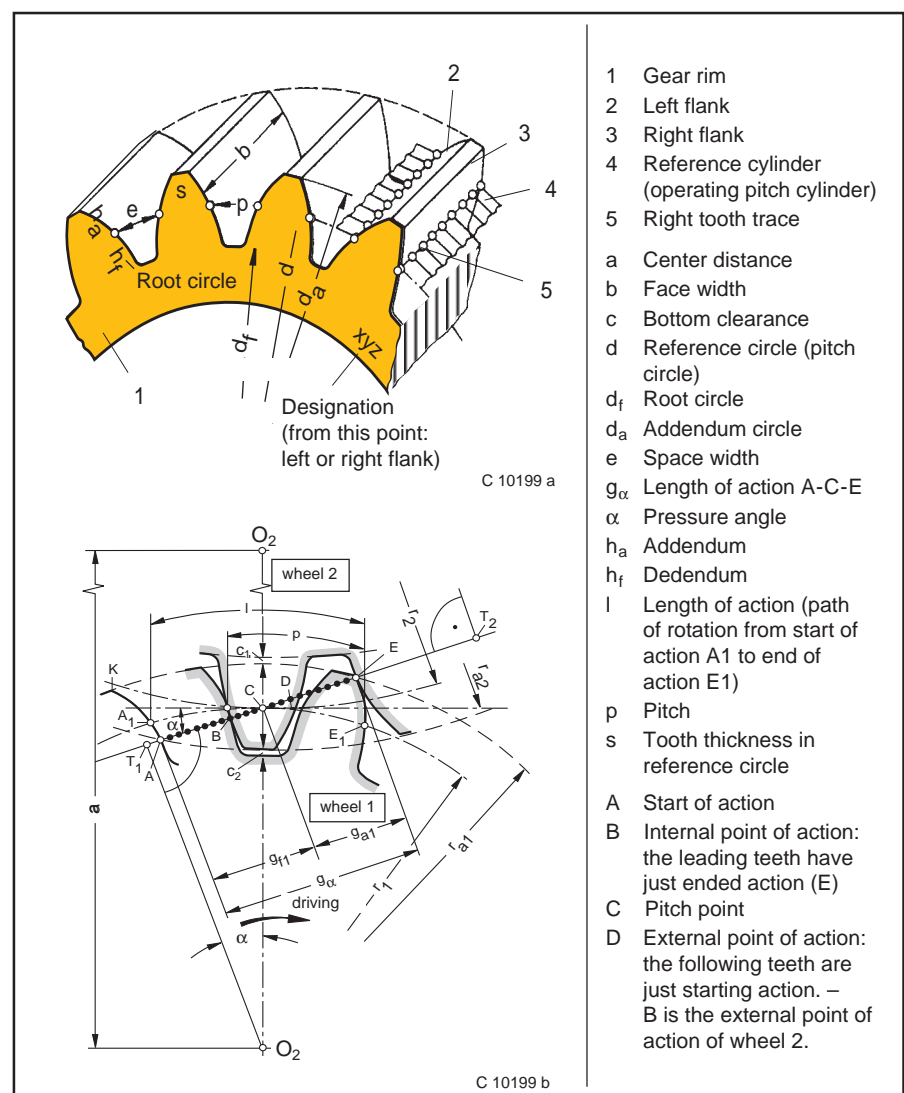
Nomenclature and dimensions of involute gears (no profile offset)
